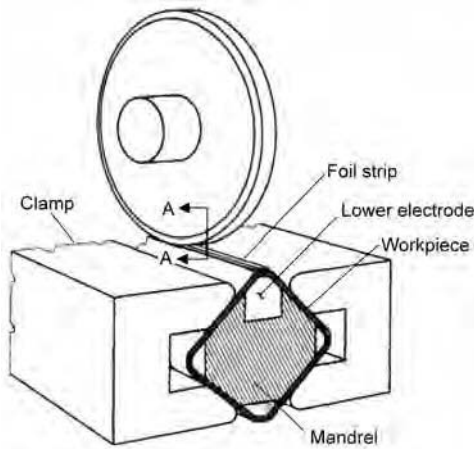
Seam welding with single wheel and lower electrode
